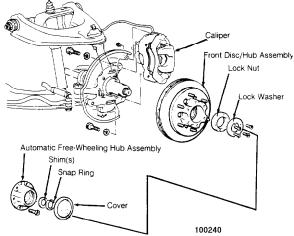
Exploded View of Front Brake Assembly (4WD) Courtesy of Mitsubishi Motor Sales of America.
